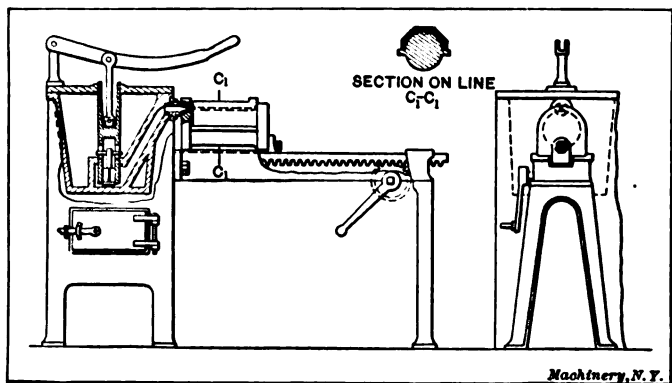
First Die-casting Machine built for Miscellaneous Work (1877) set up for Casting Bearings
